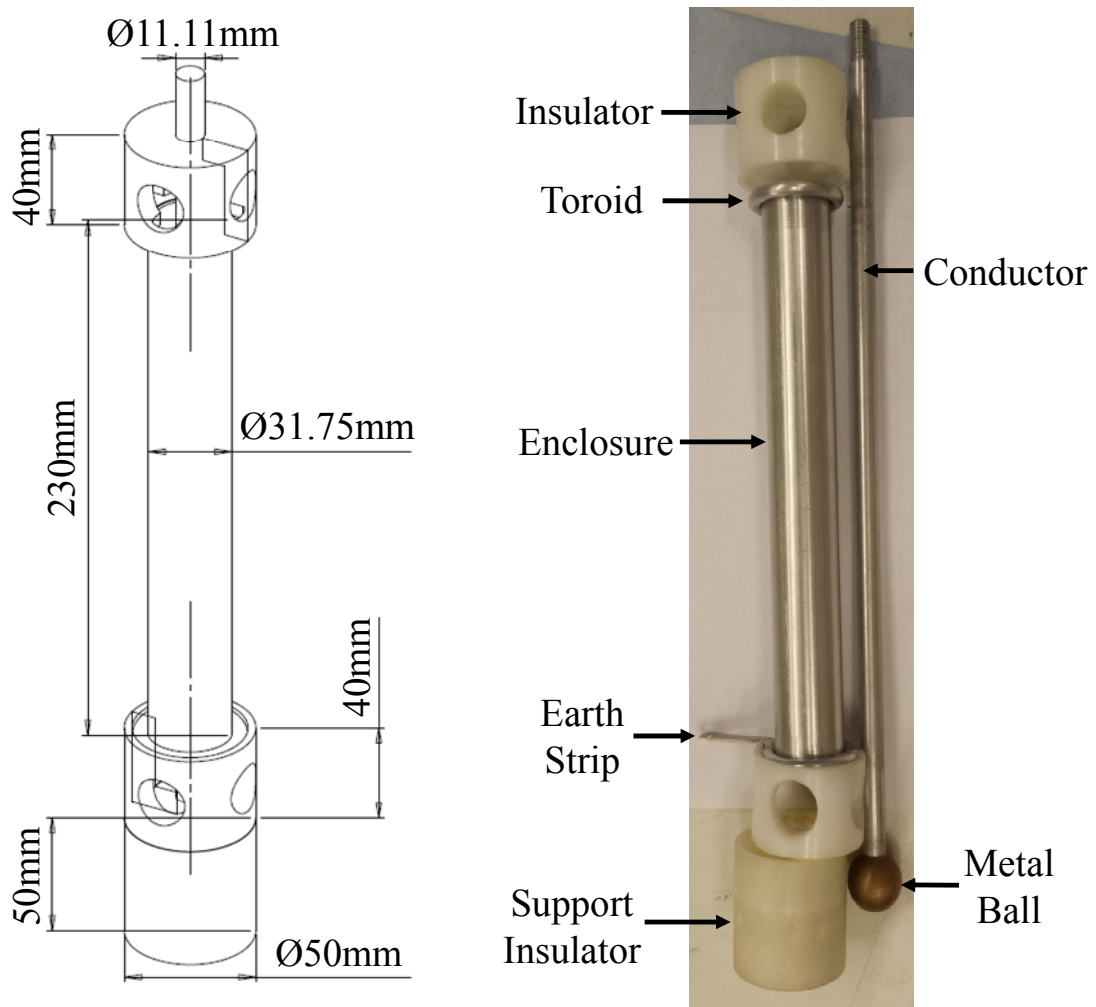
Solidworks design and photograph of the fabricated Trial Prototype.
